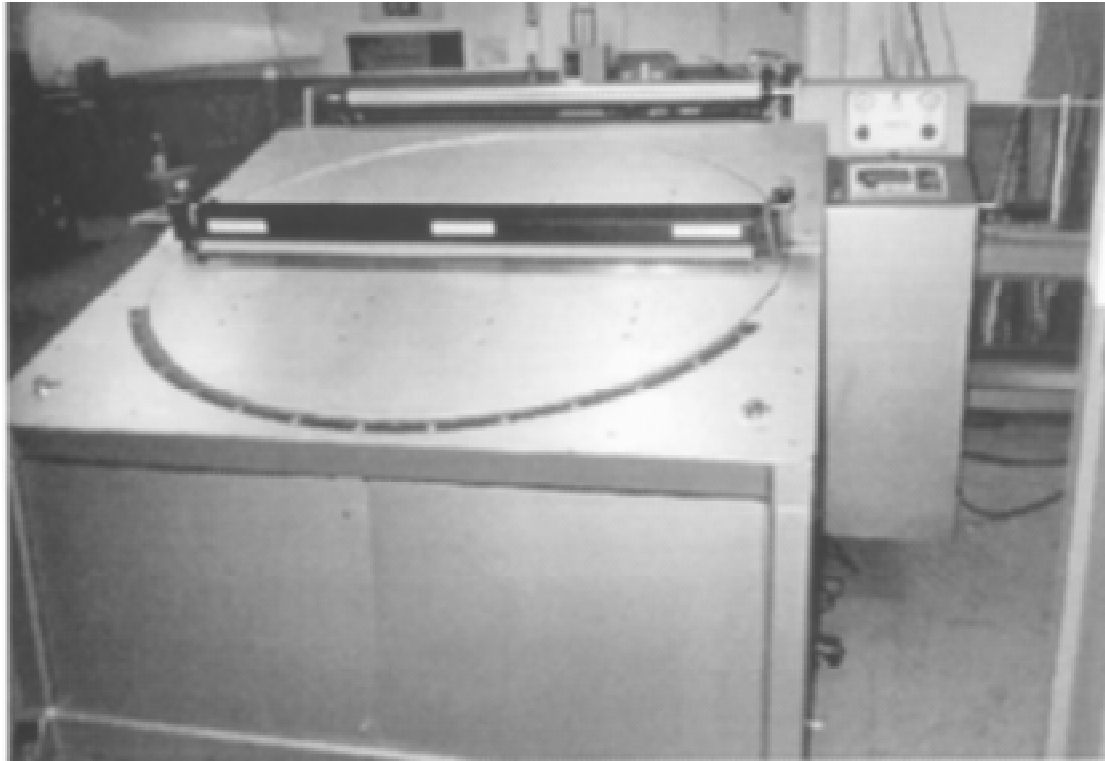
Sheeter Press, Courtesy of Century Design, Inc.
